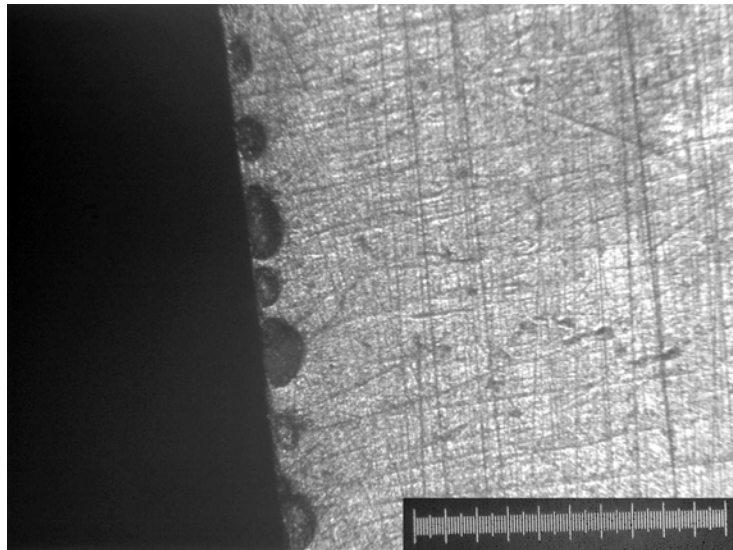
Microstructure of advanced machined process specimen#6 showing the defects caused by milling process at location # 2 at magnification 100x
